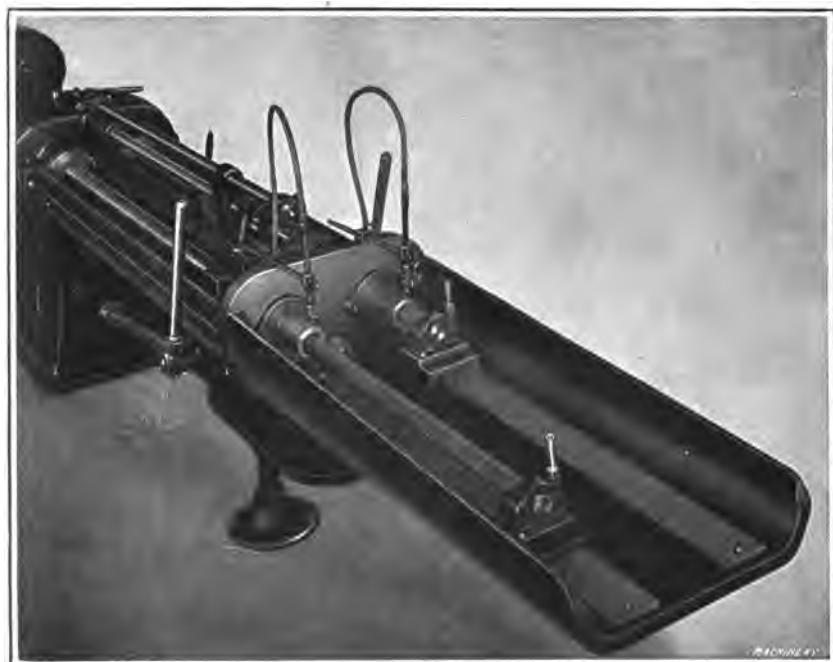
Double-head Broaching Machine equipped with a Supporting Table and Slide to hold Outer Ends of the Broaches in Alignment
